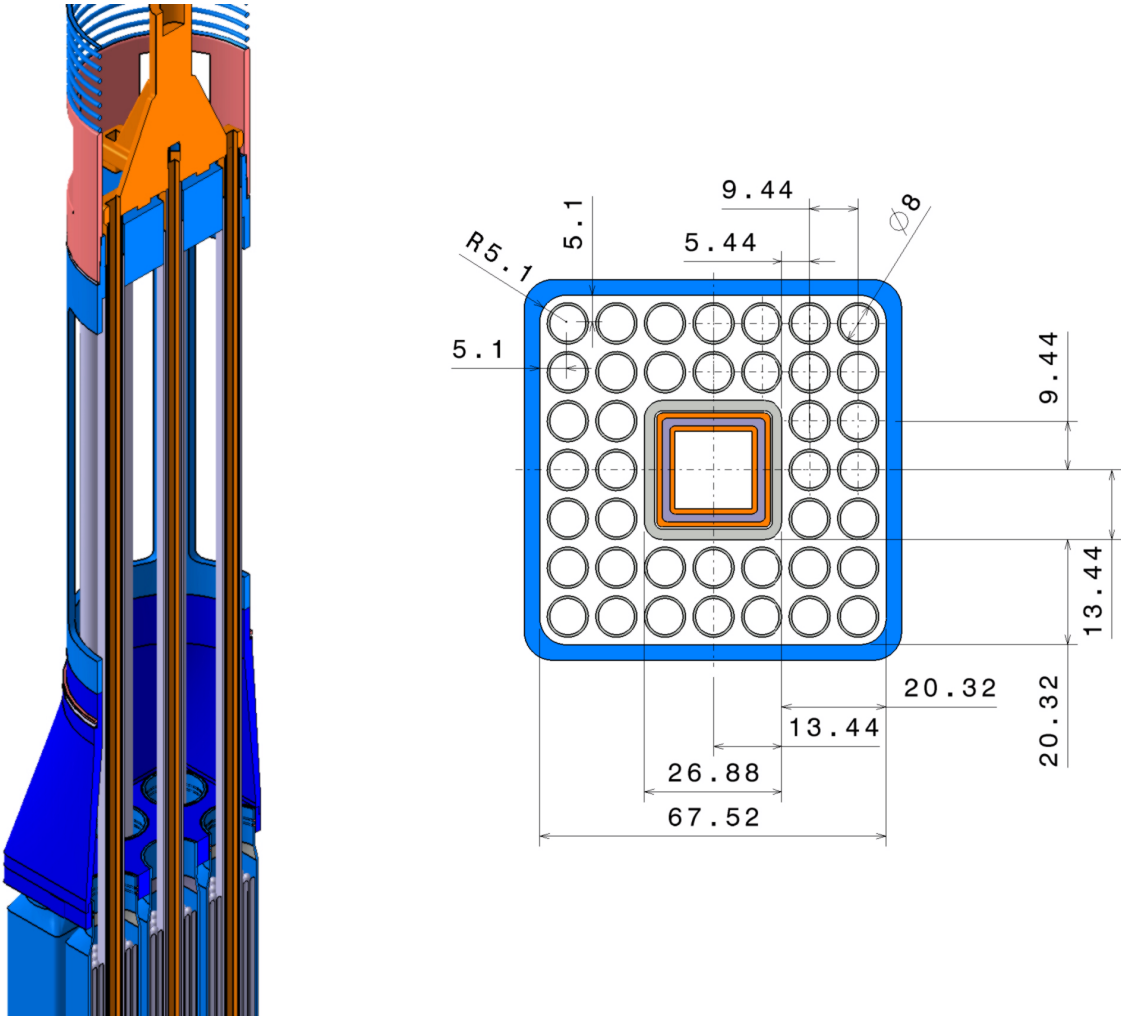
Dimensions of one cluster within the headpiece geometry
